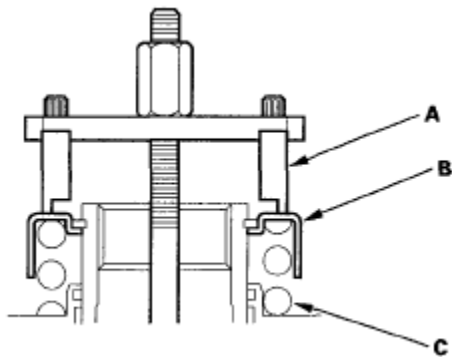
Identifying Identifying Clutch Spring Compressor Attachment, Spring Retainer And Clutch Return Spring
